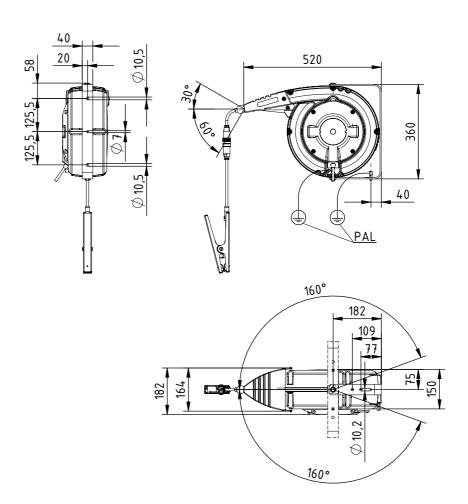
Assembly of the aluminum cable rewinder 601KR/AW
